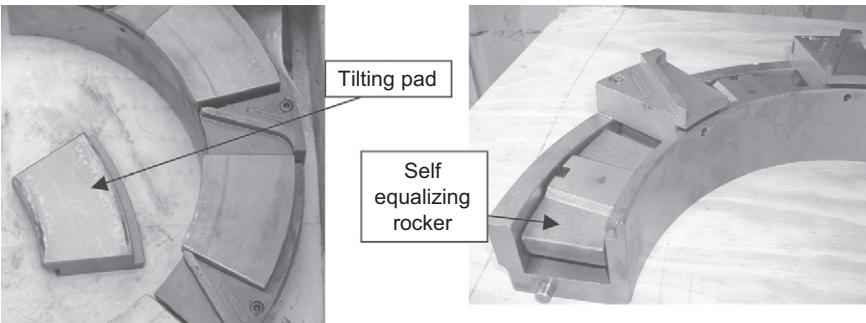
Kingsbury-type self-aligning thrust bearing.
